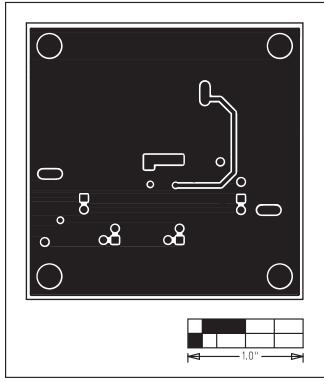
MAX17083 EV Kit PCB Layout—Solder Side
